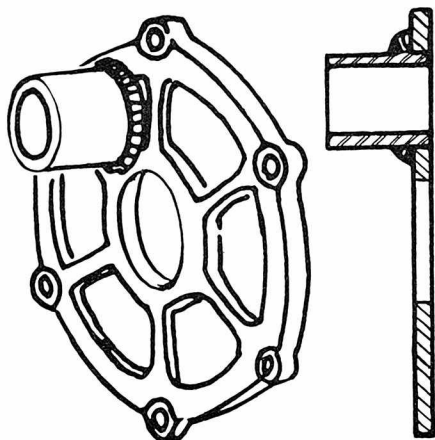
View of rotary valve cover showing method of installing tube for larger carburetor. Outside diameter of tube must fit carburetor and inside diameter of tube should match carburetor bore.
